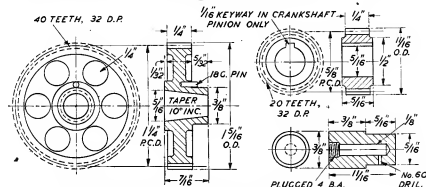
Details of timing gears (1 off each part, extra pinion without keyway used as idler) and idler pinion stud.
